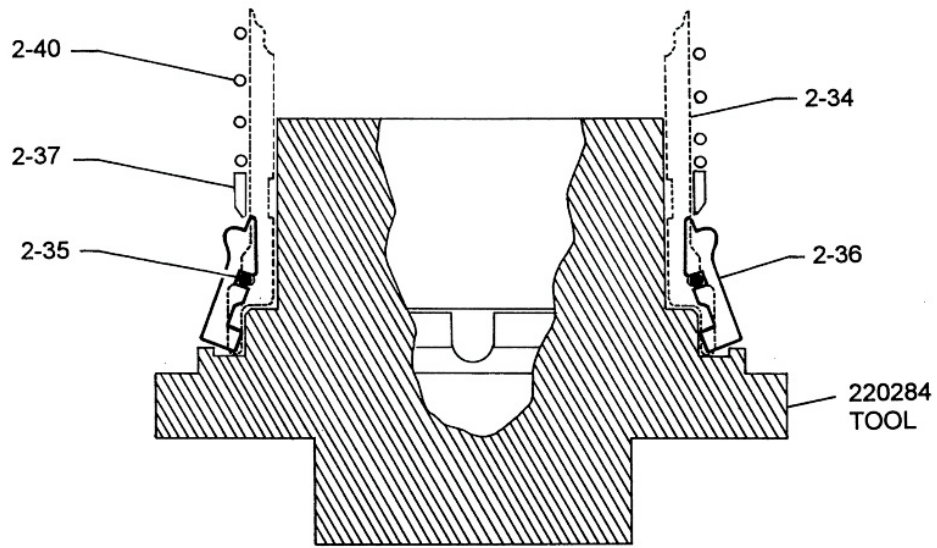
USE OF 220284 TOOL TO INSTALL LOCKING LUGS (36)
